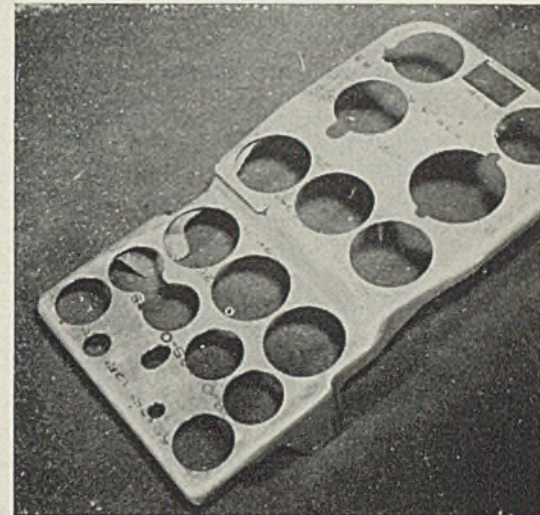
Instrument panel, completed on routing machine in  $7\frac{1}{2}$  minutes, formerly required 7 hours with fly cutters and drills
